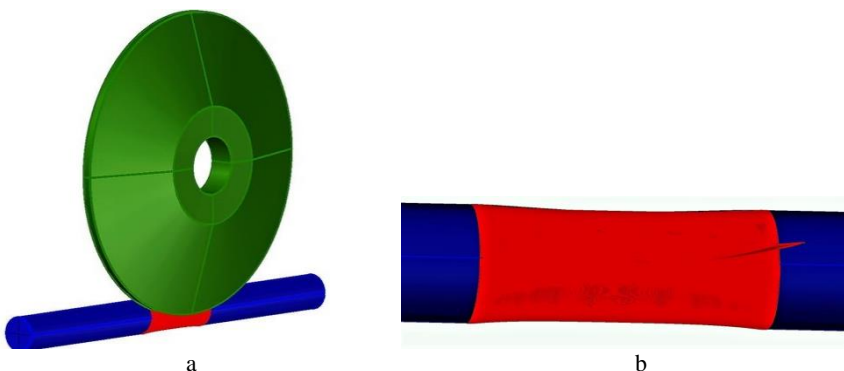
Actual contact patch of the dished wheel (a) with the involute cylinder at the tooth base, taking into account the pre-machined section of the gear width with subsequent tool displacement in the longitudinal feed direction (b).
